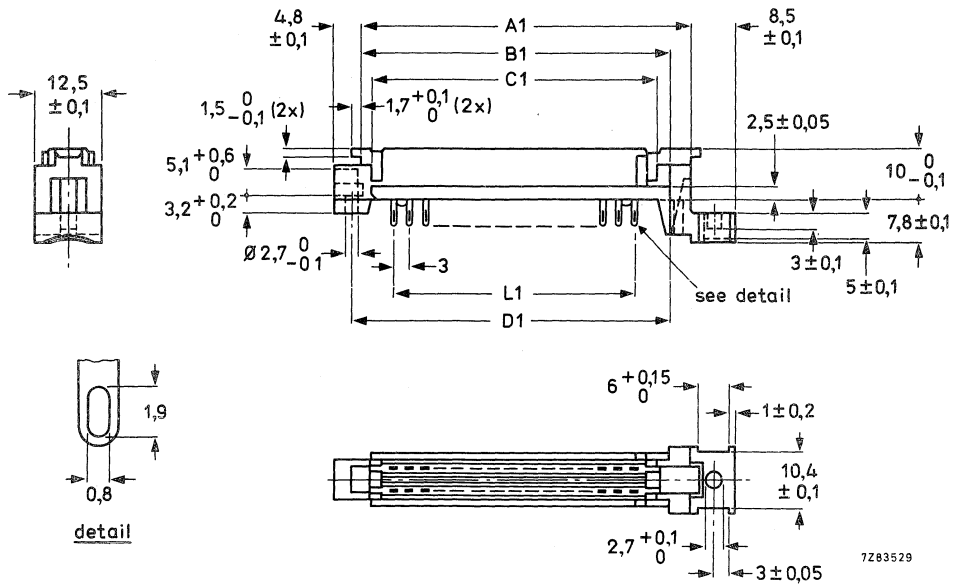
Female part with solder tags; see Table 3 for dimensions A1, B1, C1, D1 and L1.
